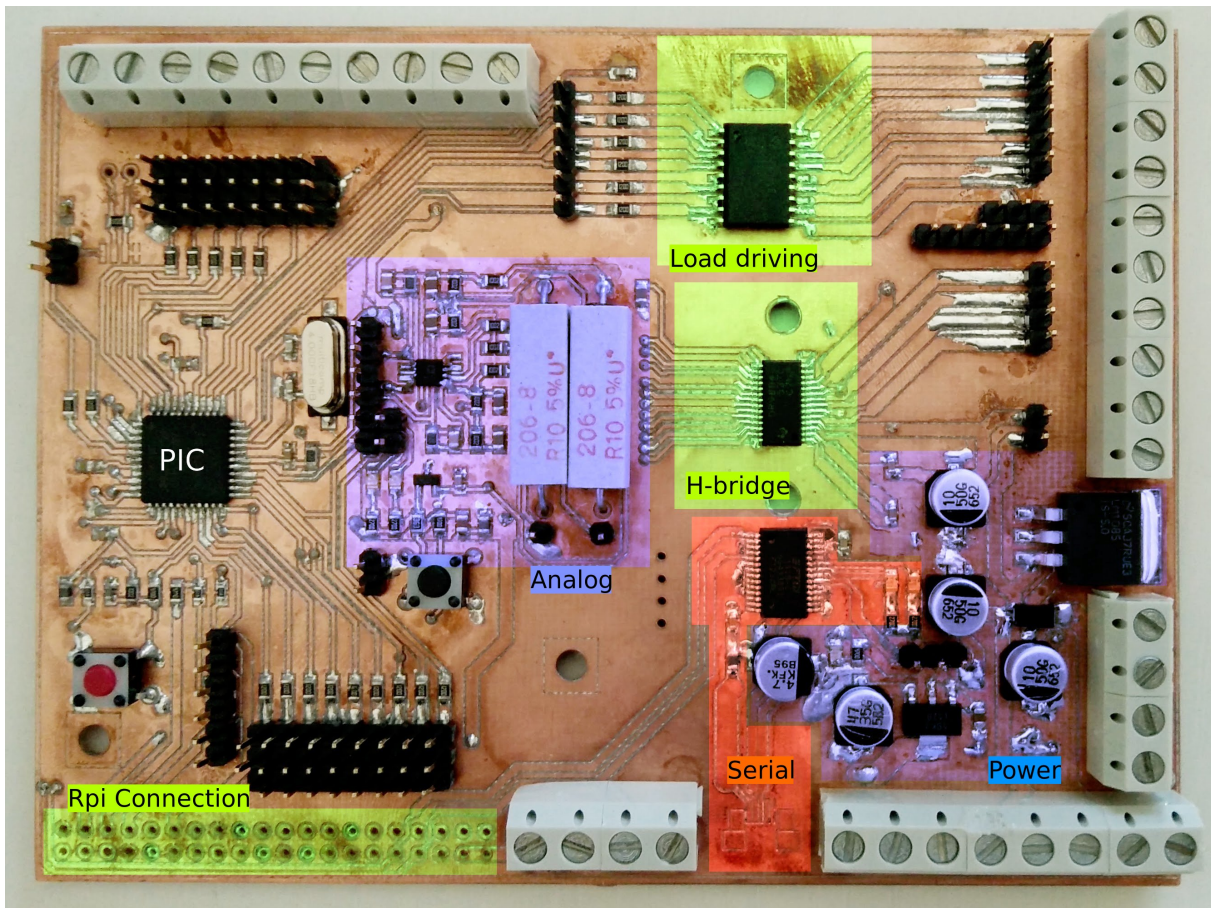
Custom made controller board with essential components soldered. The colours identify each functional zone.
